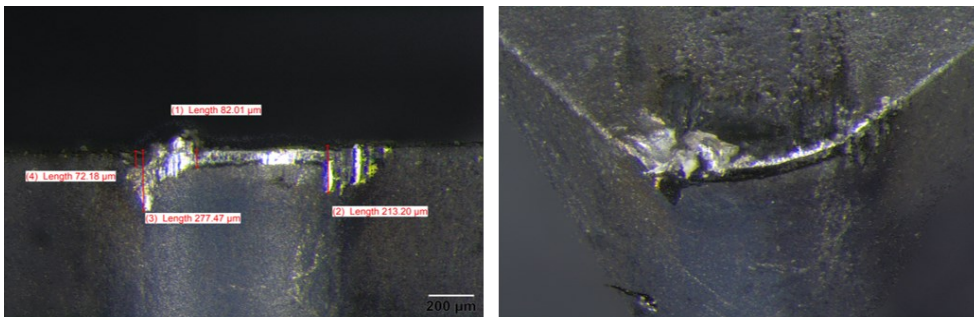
TiAlN* flank (left) and flank+rake (right), machined at 60 m/min for 5 min in argon.
